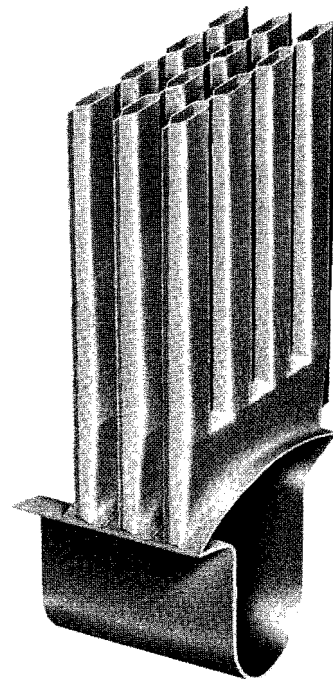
Radiator Section Showing Joints Formed with Mash-Seam Welder
